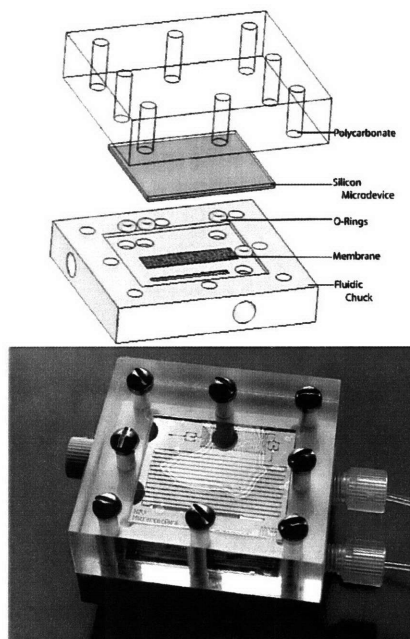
Exploded schematic view of the microfluidic device and packaging (top), and final packaged silicon device (bottom). The membrane and silicon microdevice are sealed by compression using Teflon o-rings with the fluid chuck and polycarbonate top plate. 1/16" PTFE tubing and fittings are screwed into to the chuck.
